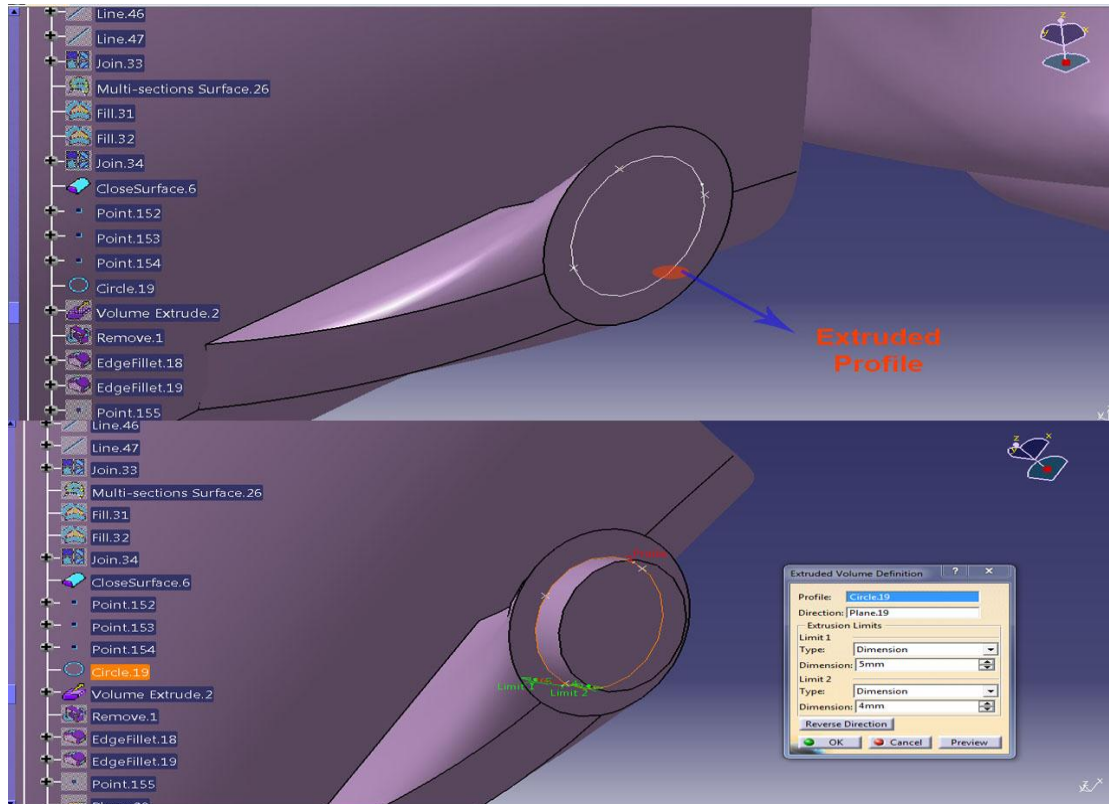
Indicator's lights attachment peripheral surfaces.
